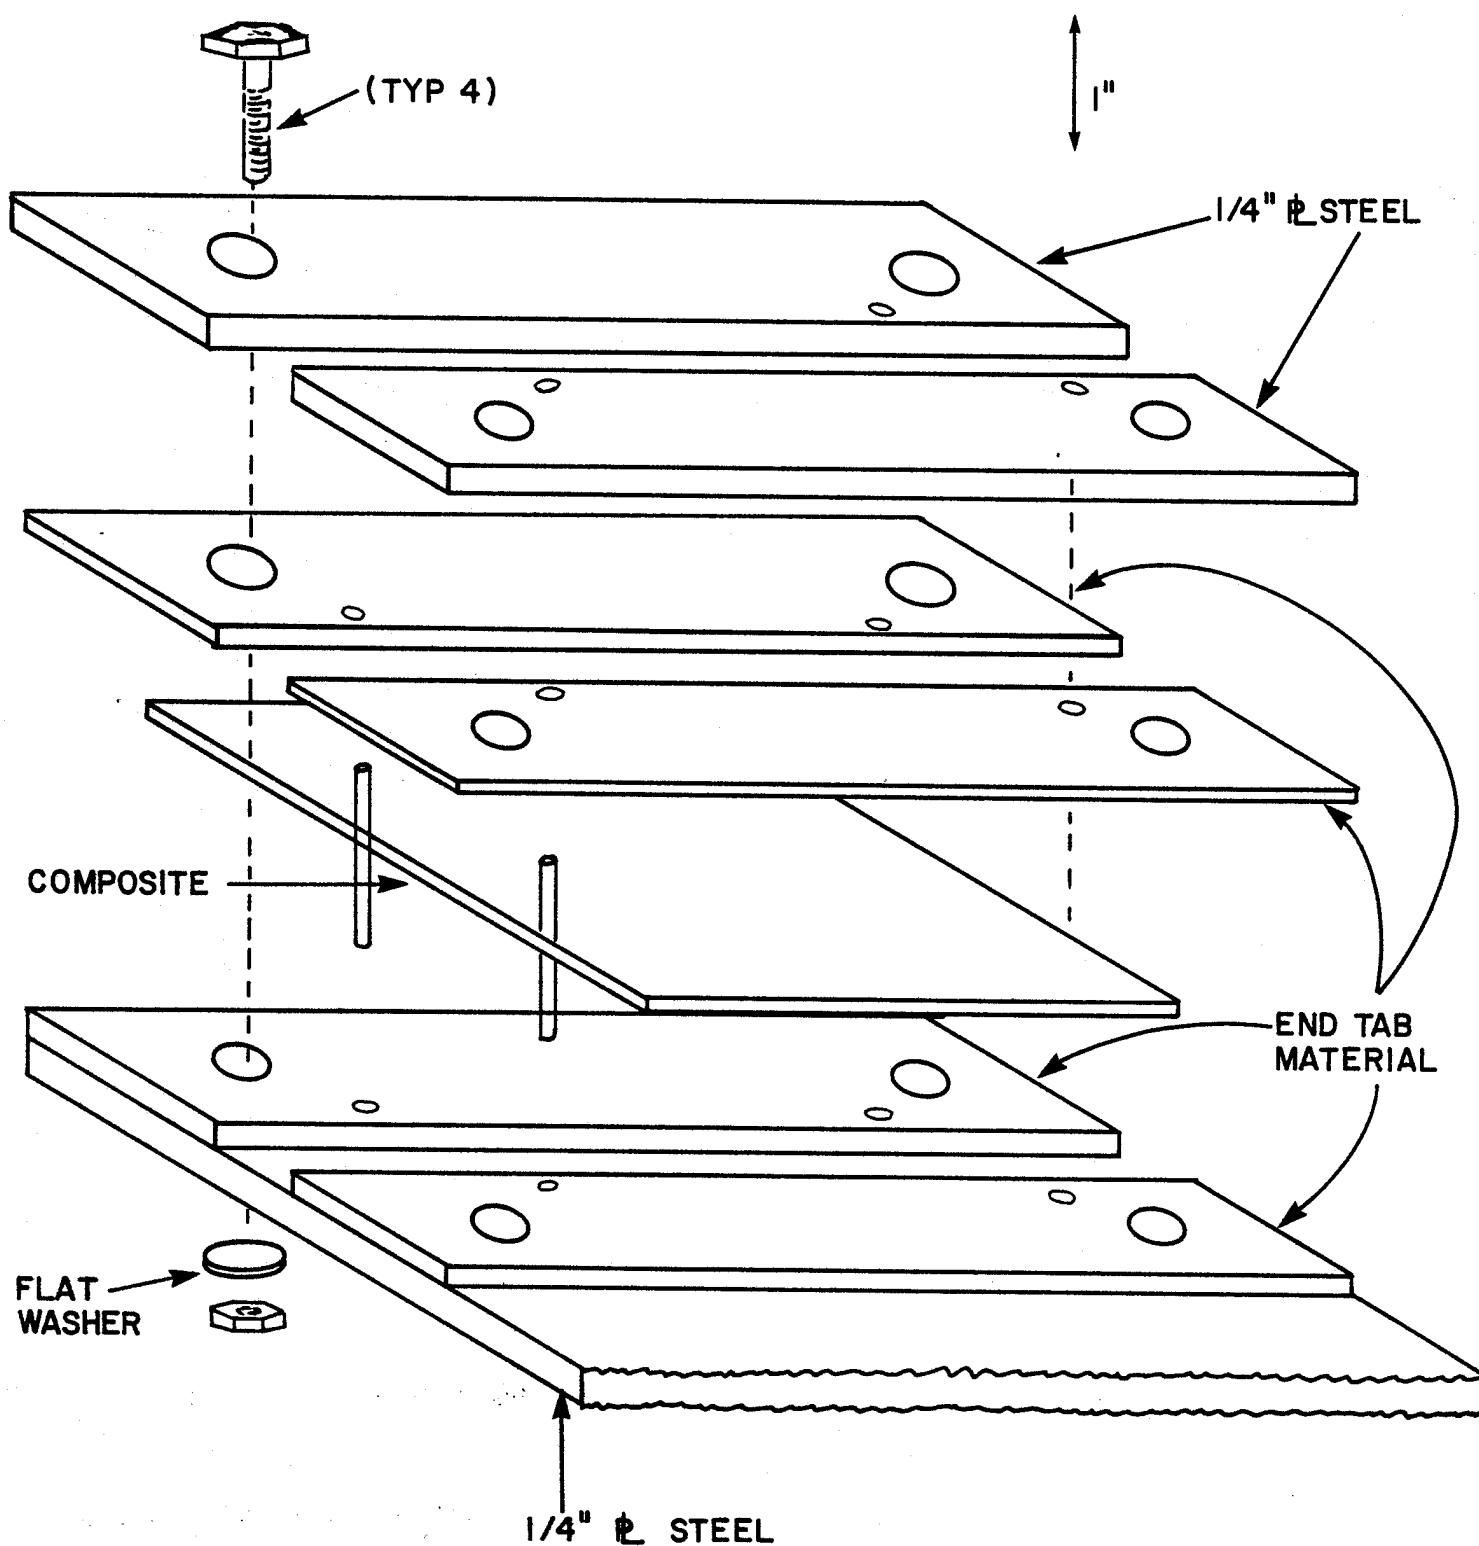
COMPRESSION END TAB BONDING FIXTURE
